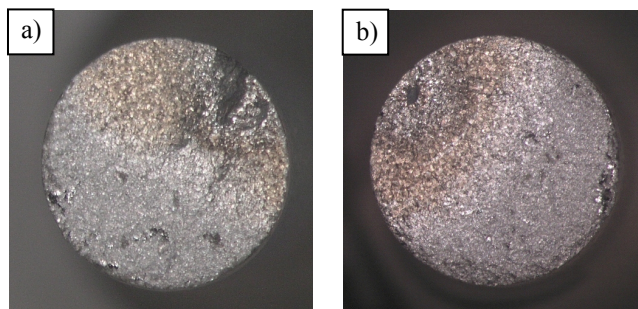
Examples of fracture surfaces, sample E2-1 (a), sample E2-2 (b)
